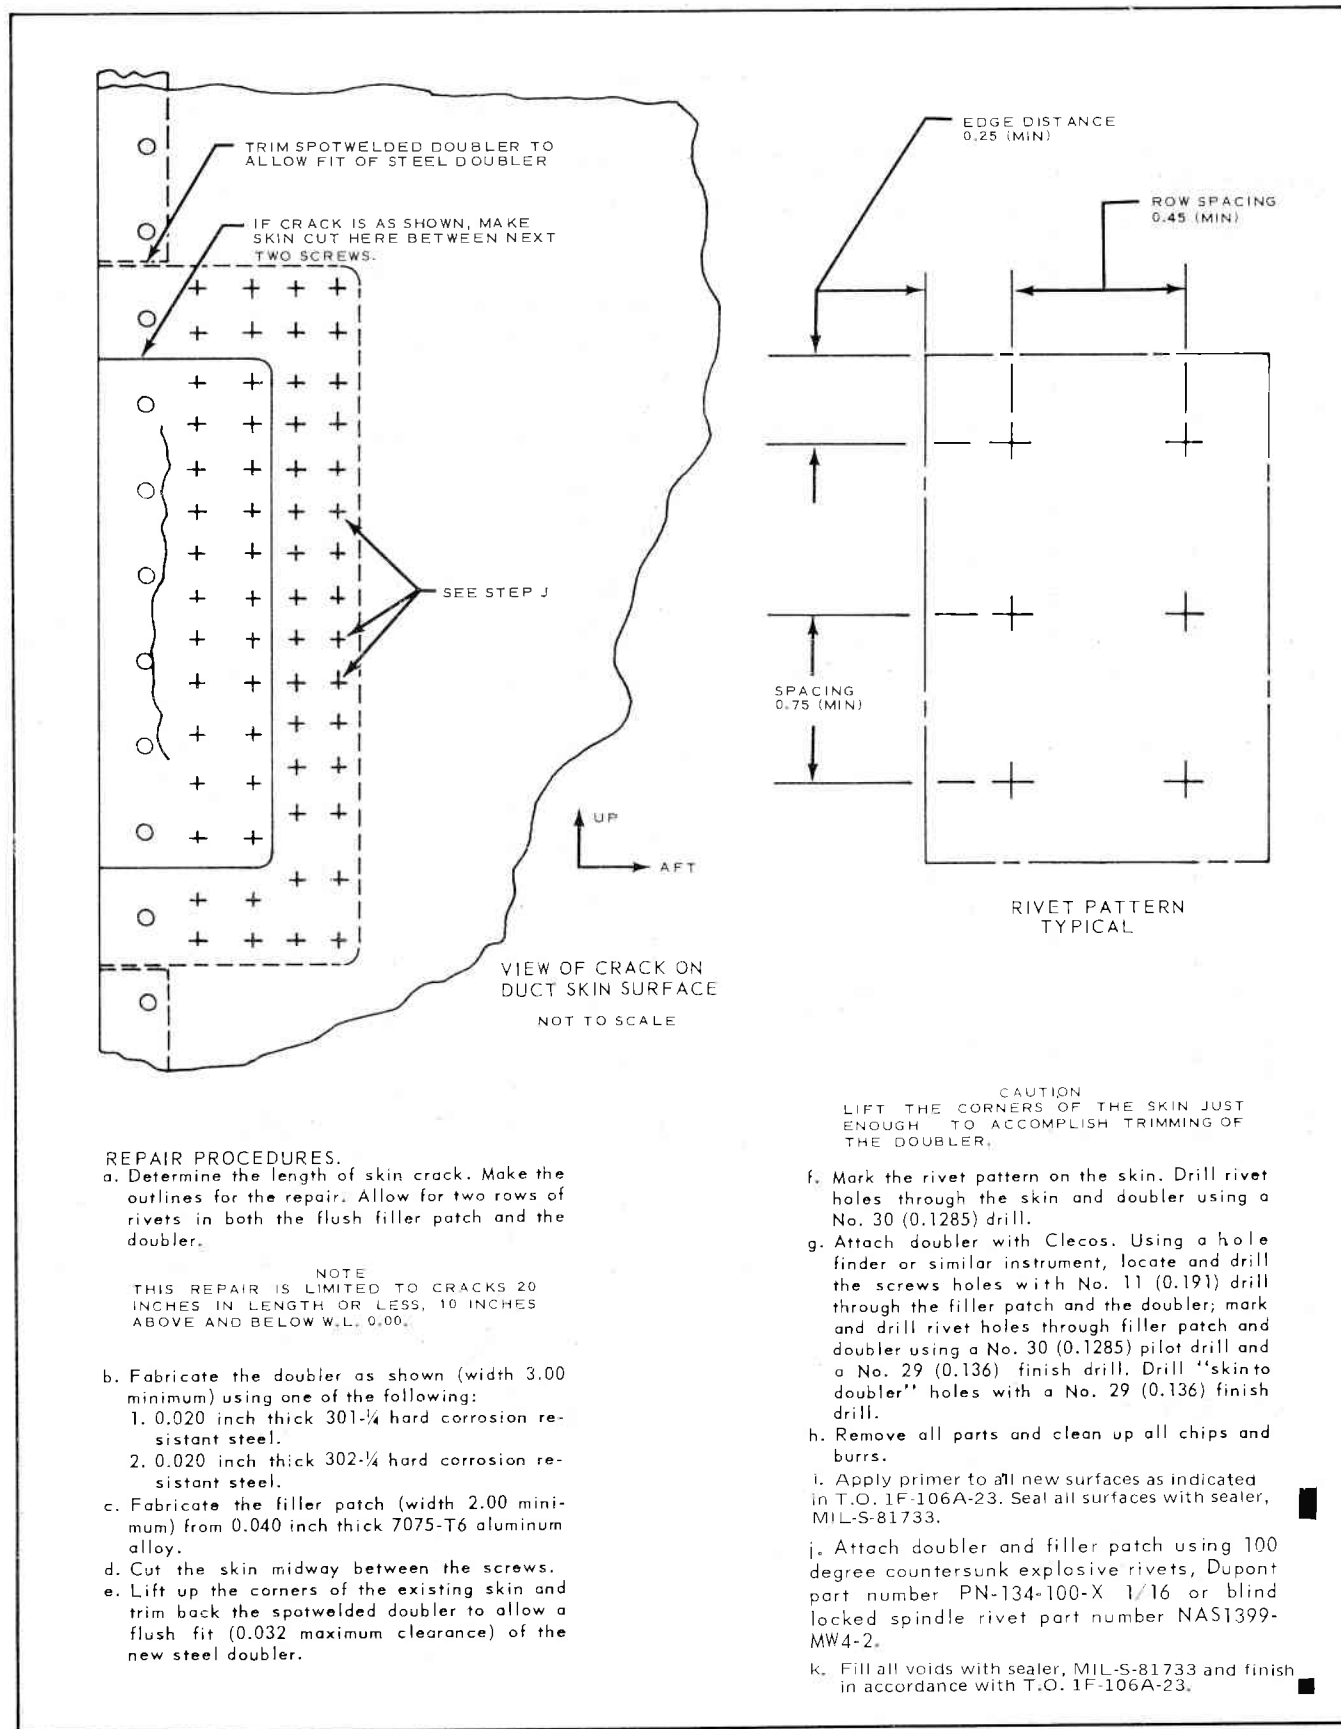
D. Air Intake Duct, Skin Crack – Typical Repair (Sheet 2 of 3)
